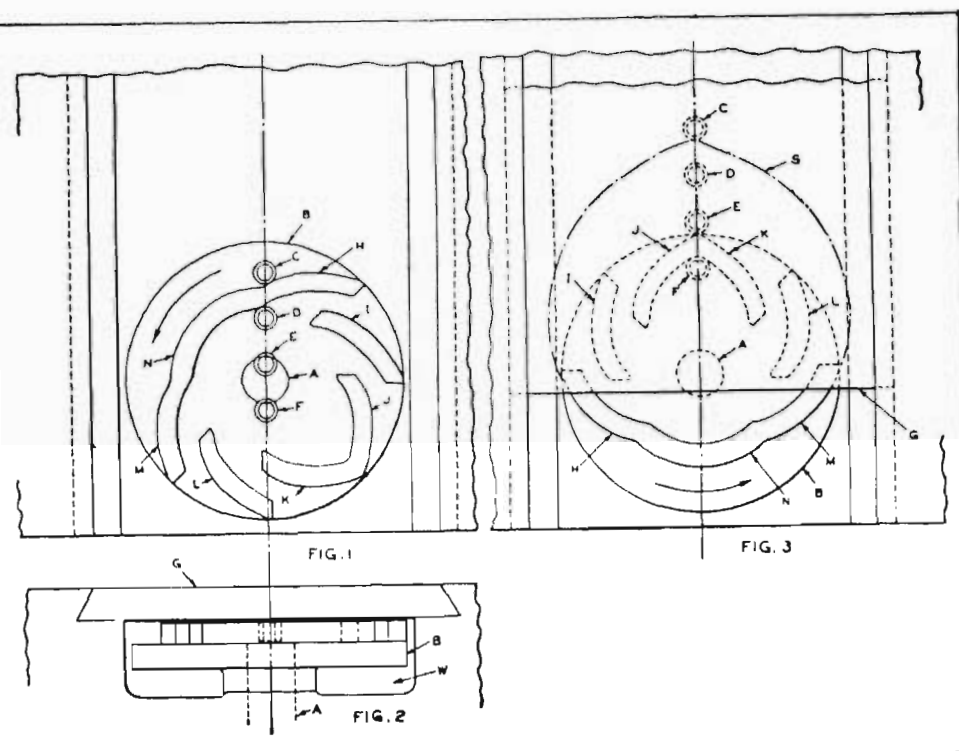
View of Cam for Operating Slide Shown with Slide Removed but with Slide Follower Rolls in Positions They Occupy with Slide at Lowest Point of Travel. Fig. 2. End View of Cam B and Slide G. Fig. 3. Plan View of Assembled Cam B and Slide G with Latter Member at Highest Point of Travel.
